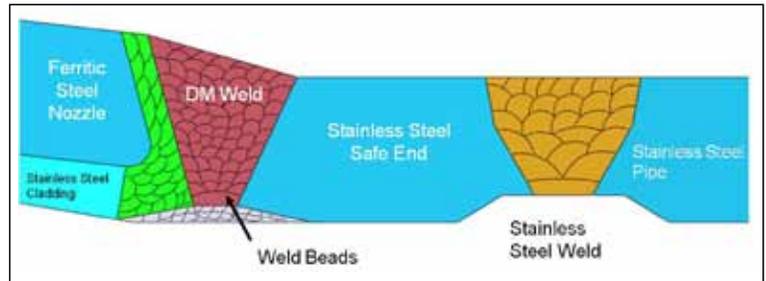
Cross-section of nozzle to pipe weld highlighting weld bead pattern
